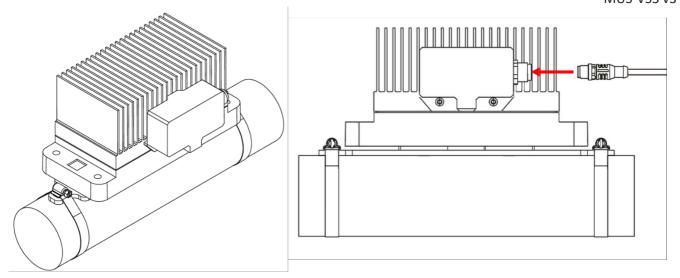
Power supply (Thermoelectric generator module-Tube mounting) connection
